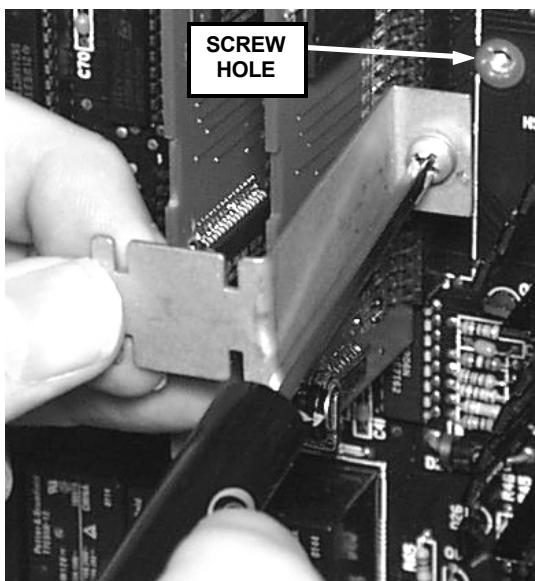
While holding screw in place with screwdriver, insert screw into controller PCB hole and secure.
